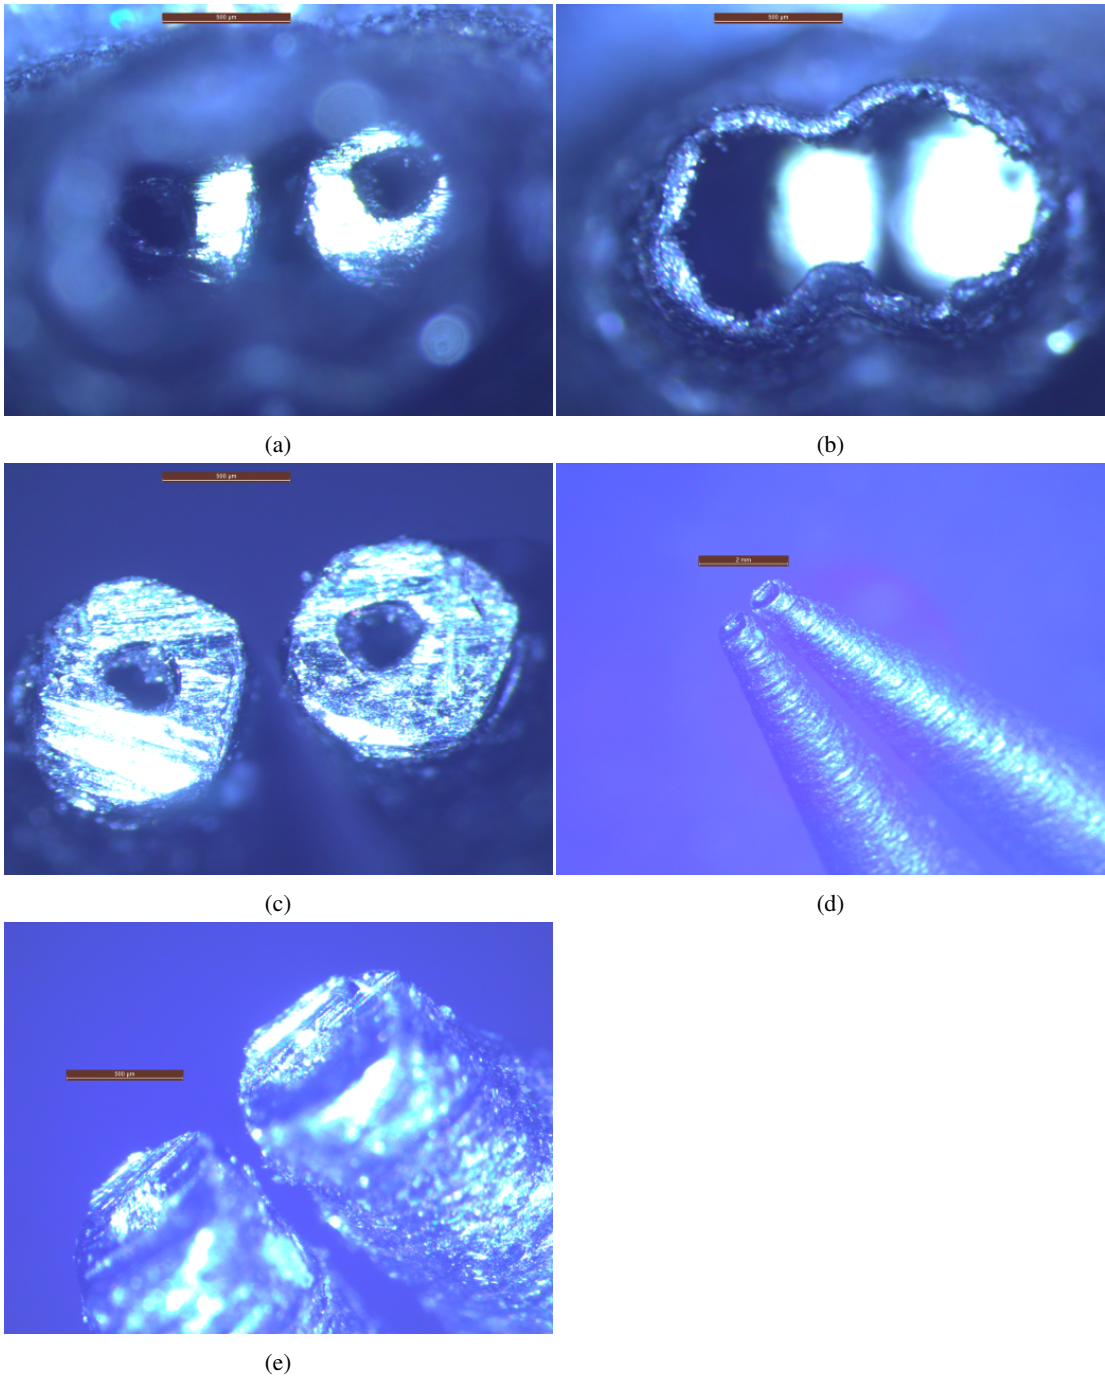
(a-b) Tip of the assembled inner and outer nozzles. (c-e) Tips of the inner nozzles after cleaning.)
